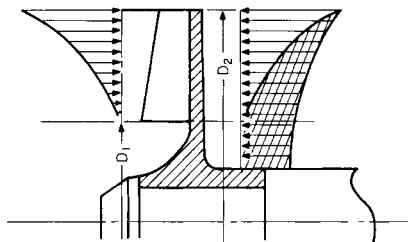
Axial thrust in a semiopen single-suction impeller
